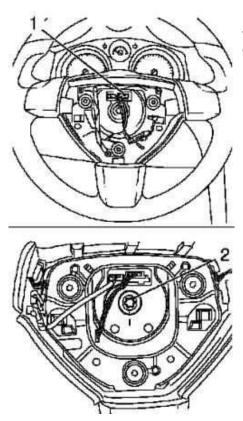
Removing the steering wheel: 1 - the wiring harness connector audio 2 - bolt mount
